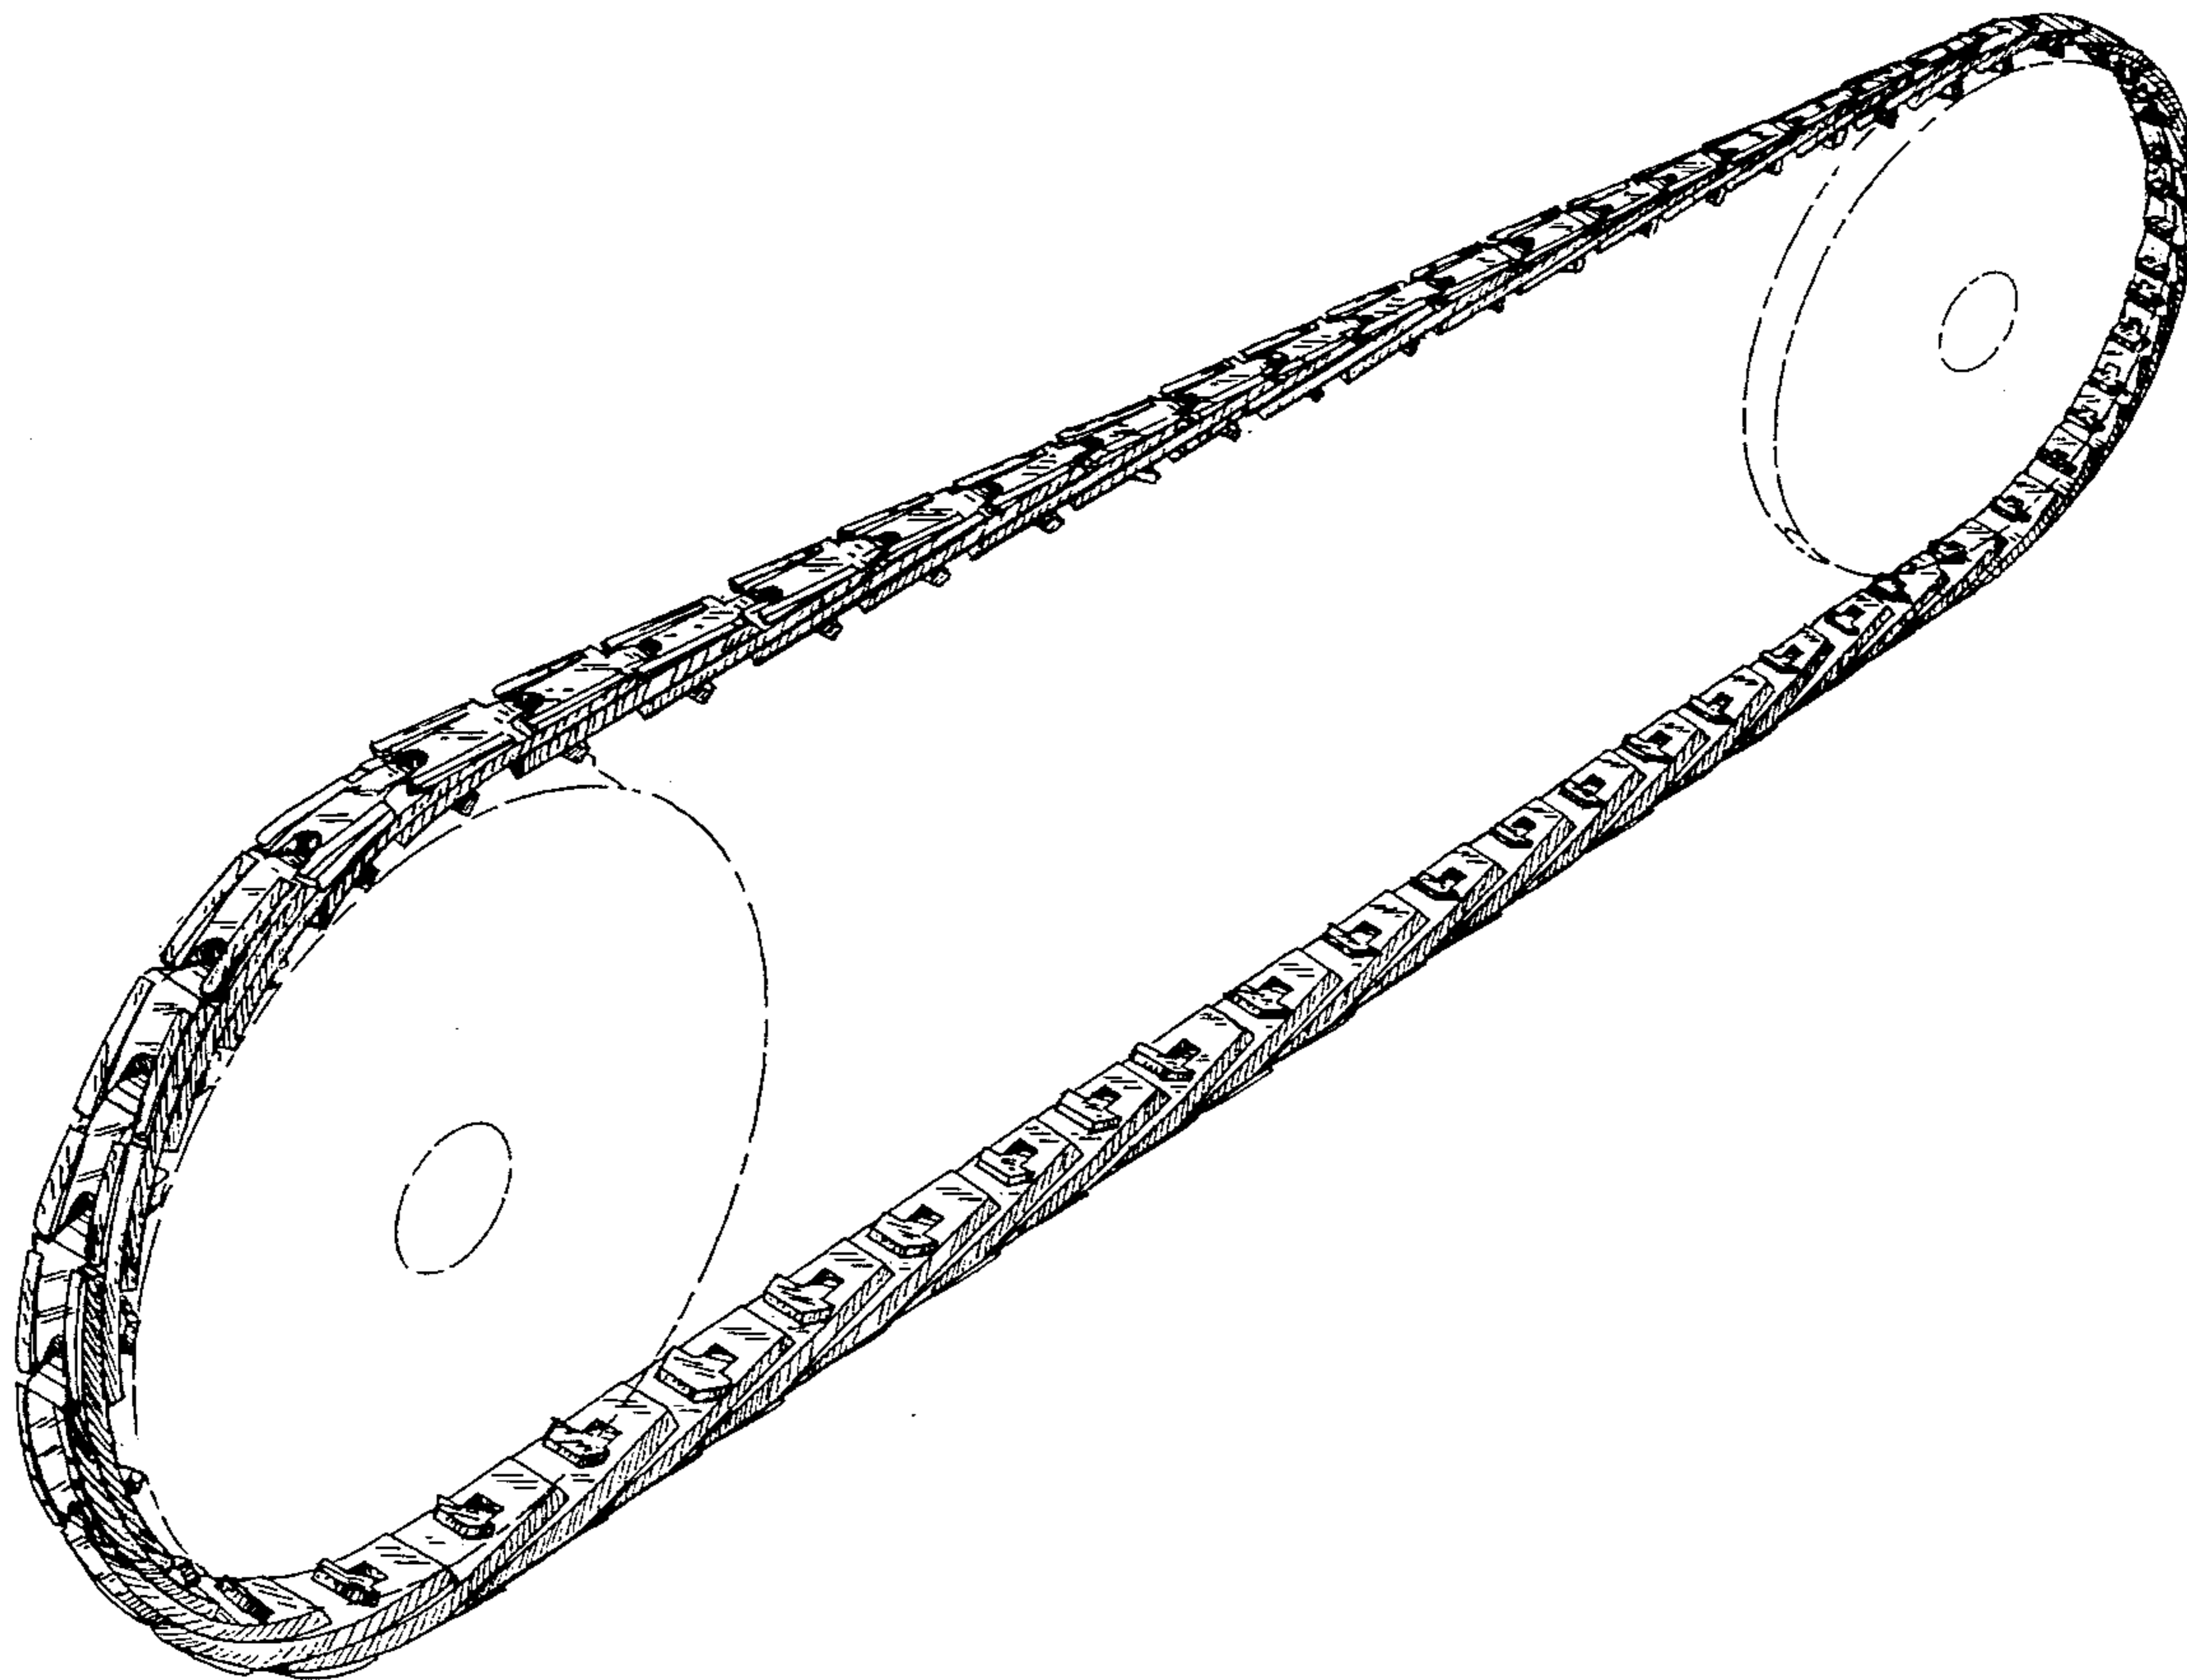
is a perspective view of a link belt for machinery showing my new design in a position of use, the broken, line showing the pulleys is for illustrative purposes only and forms no part of the claimed design;
